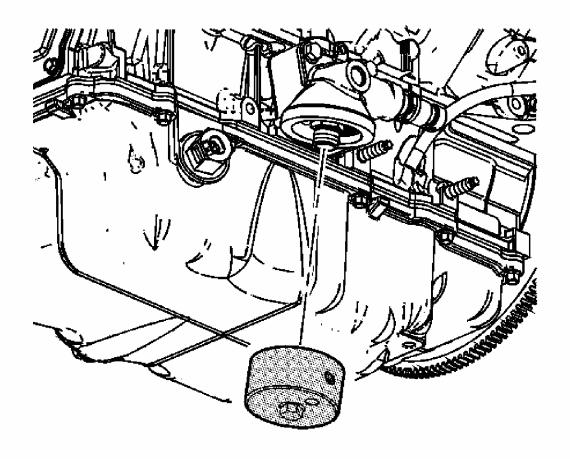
View Of J 42907 Oil Pressure Tester Courtesy of GENERAL MOTORS CORP.
